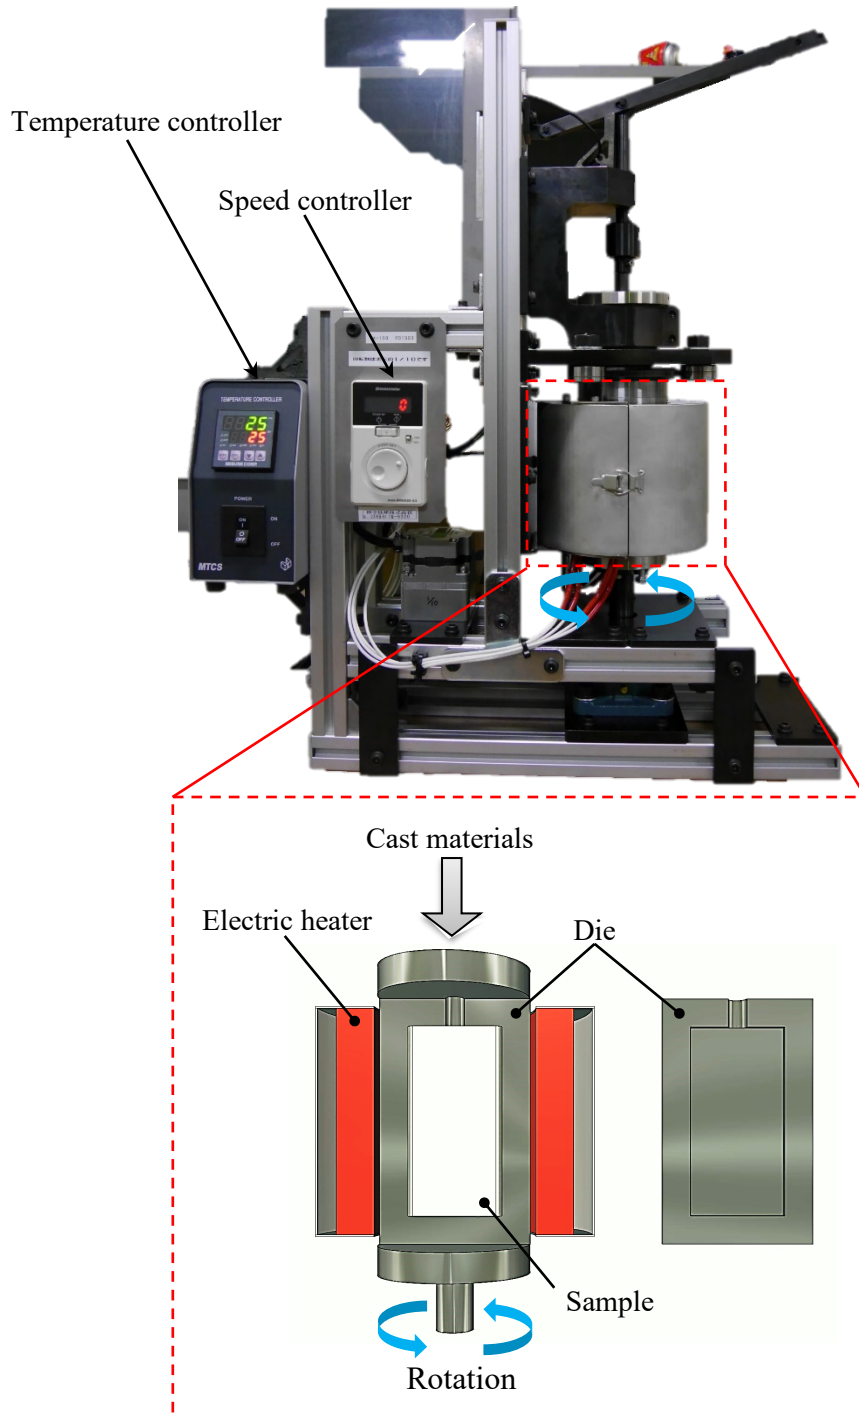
Photograph and schematic illustration of the centrifugal casting.
